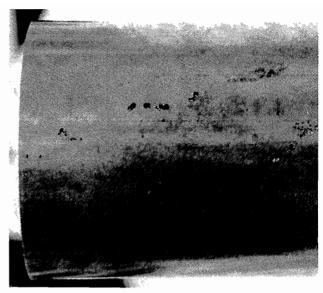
2. Pitting corrosion on the outside of a tube.
